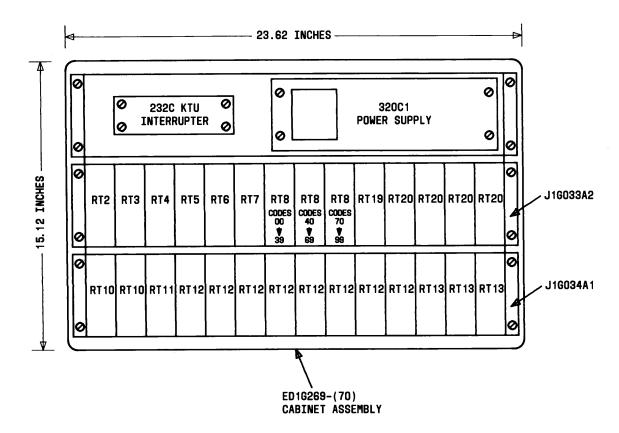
₱J1G033B SS-4 Packaged System E/W Eight Station Circuits and TOUCH-TONE Dialing (Front View Cover Removed)◀
